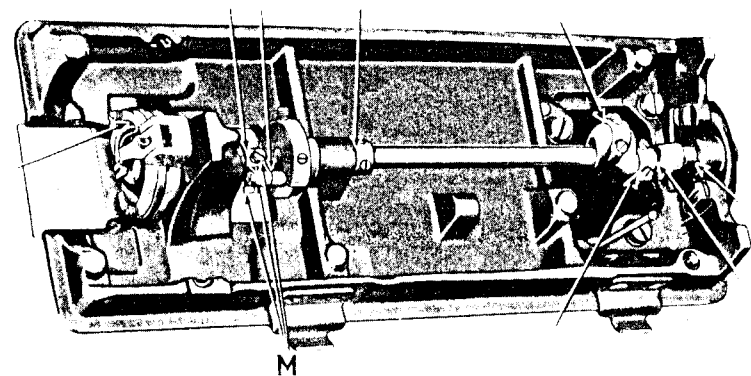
Oiling Points and Adjustment Underneath the Machine
